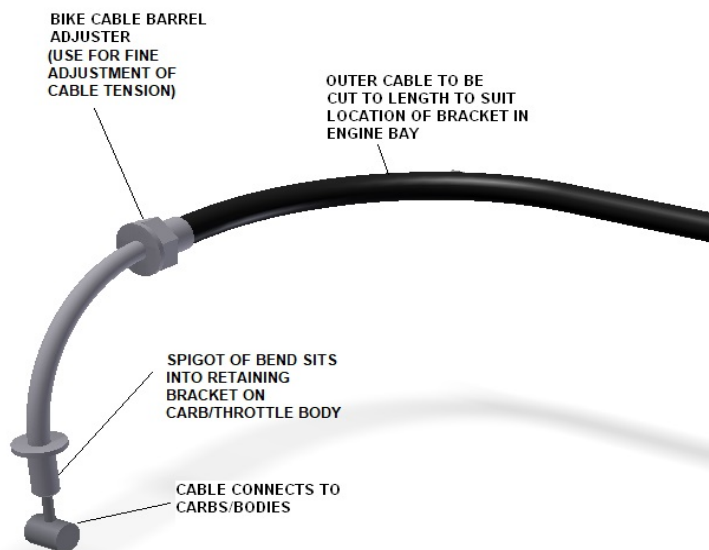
Typical arrangement using the 90deg bend provided in the kit to nicely guide the cable away from the carbs horizontally. The lower part of the bend sits into the 'C' shaped throttle bracket on most typical bike carbs and throttle bodies. The 6mm diameter nipple on the end of the inner cable can either be a fixed nipple (using our pre-made inner cable as supplied in the full cable kit) or the supplied solderless nipple. Inner and outer cable lengths will need to be trimmed to suit.
